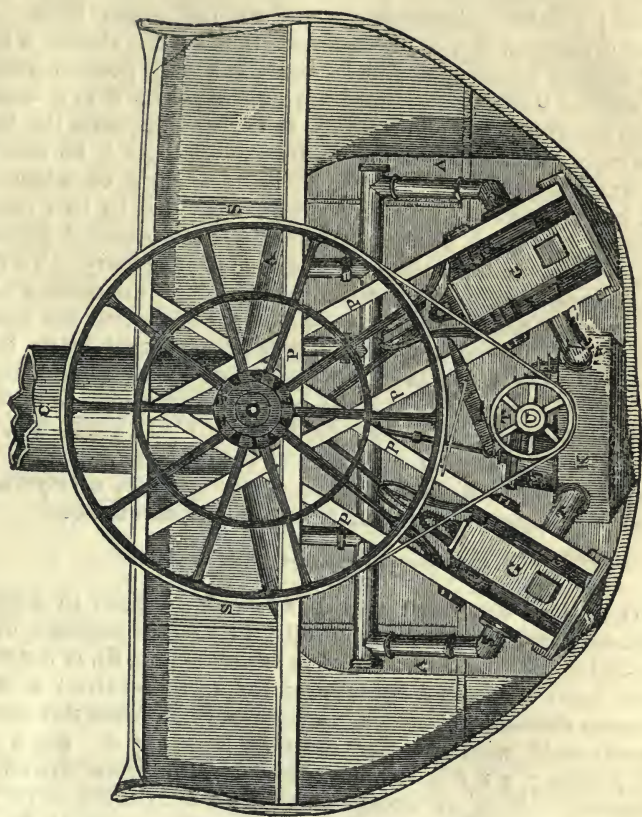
represents a transverse section of the vessel at the engine-room, with an end view of the machinery.
